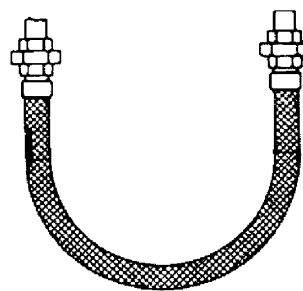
shows an incorrect installation and how a hose kinks adjacent to the couplings. The hose then has a very short working life. The installed hose shown in Figure 5 will last much longer.
